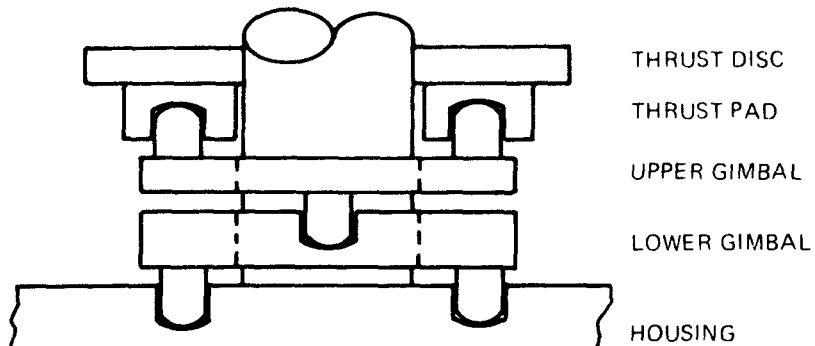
Thrust Bearing Load Equalizers
